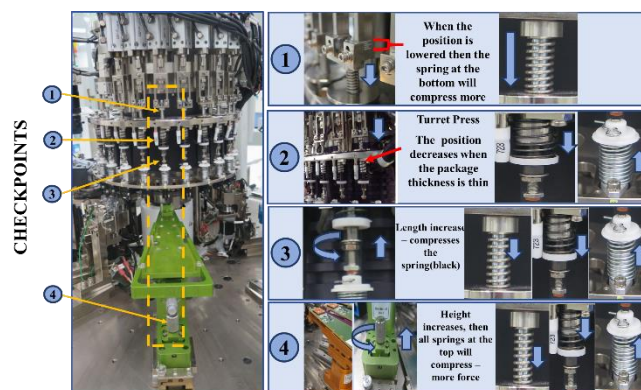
Test Site Module (Checkpoints), This checkpoint is utilized to evaluate the tools or handler components that may contribute to applying excessive force on the device at the test site
